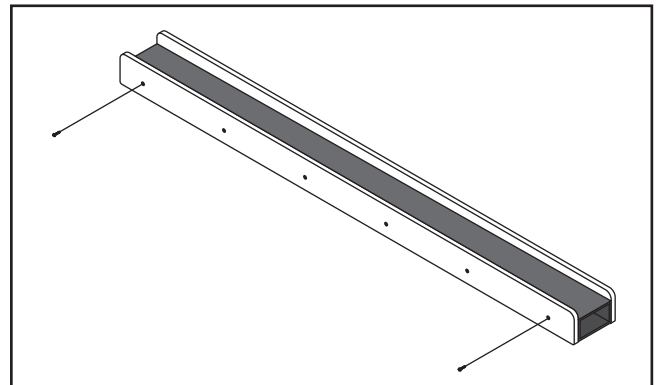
Fence and board lined up and clamped to transfer screw hole positions.
